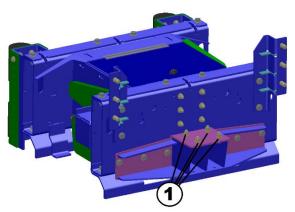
Bottom Support Bolts Image for reference only. Key 1 – Bolt Locations
